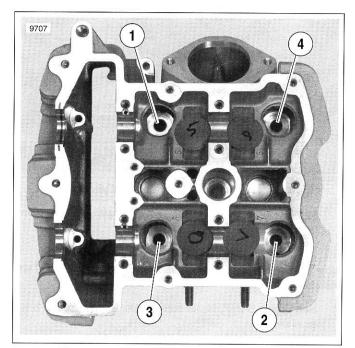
Head Bolt Torque Sequence (rear cylinder head)
